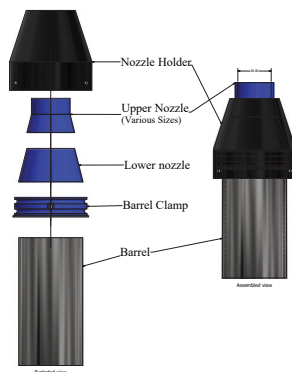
Detailed Assembly Drawing Of The Proposed Nozzle
